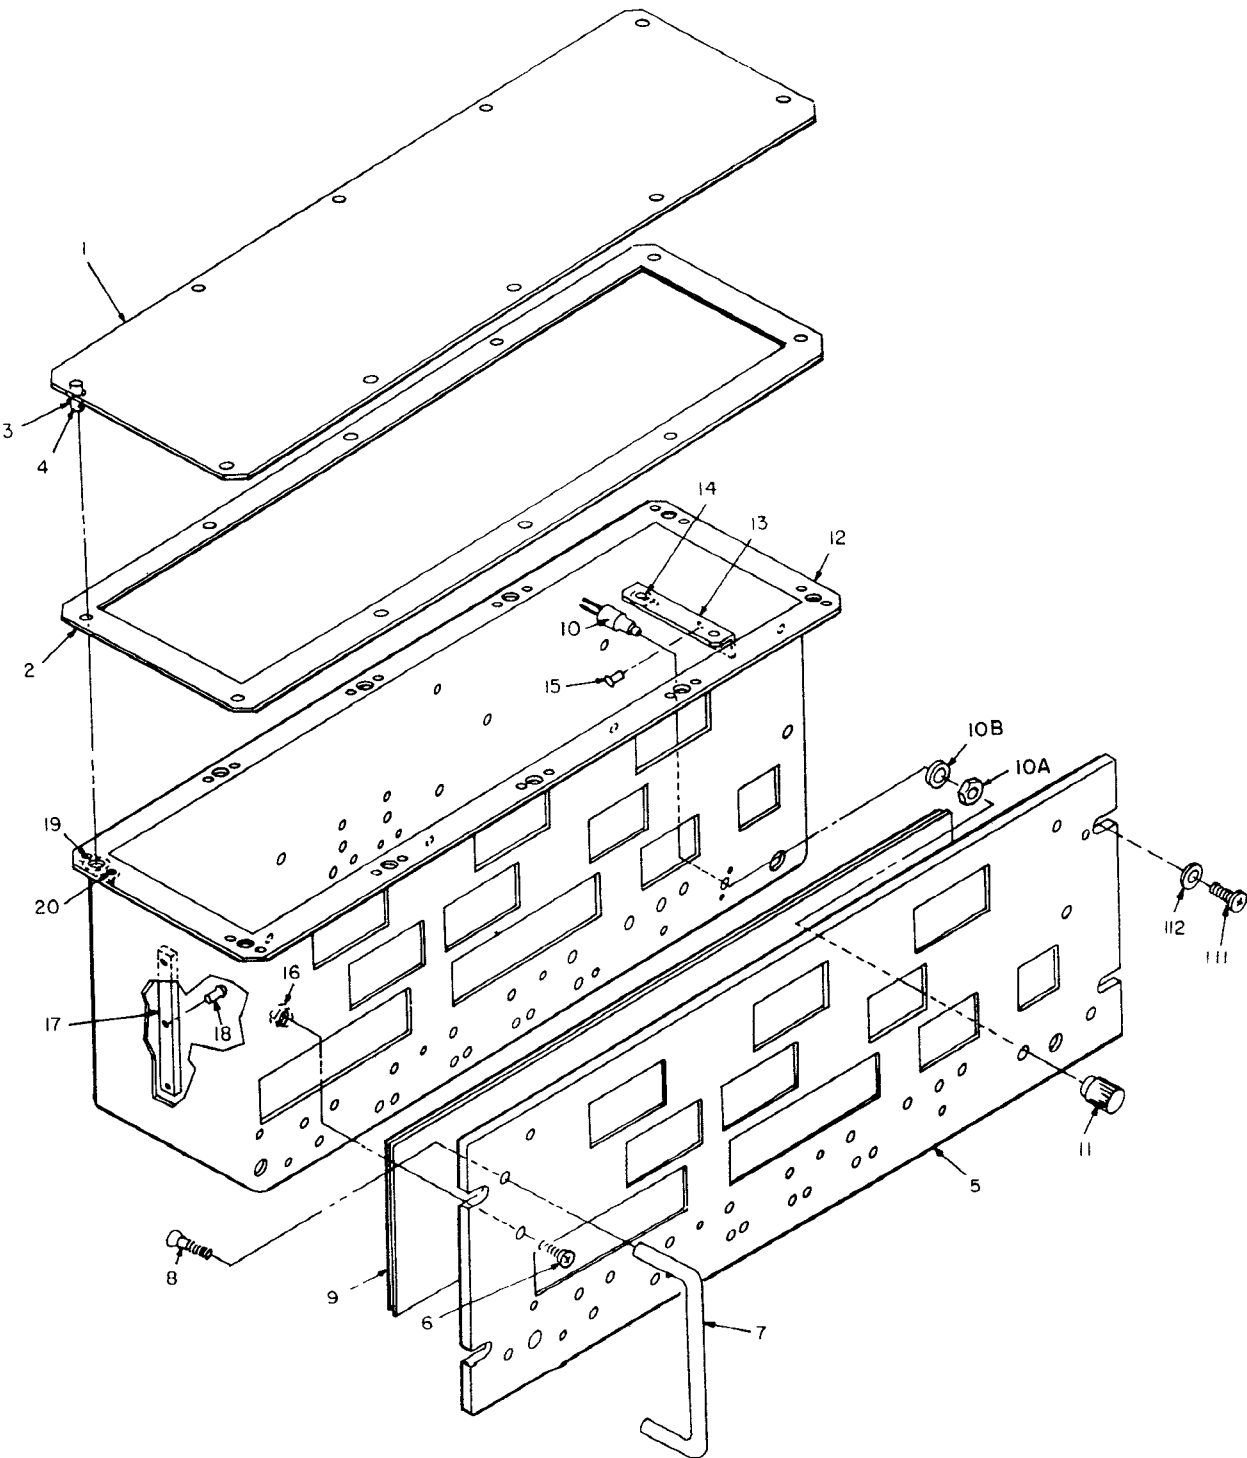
Digital Display Indicator Assembly (Sheet 1 of 3)
